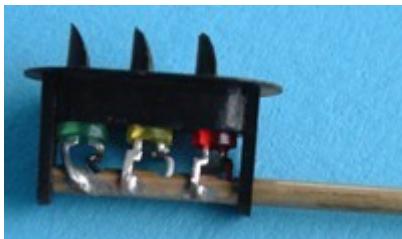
Soldering anodes. Solder anodes to mast, trim excess, and file smooth.
